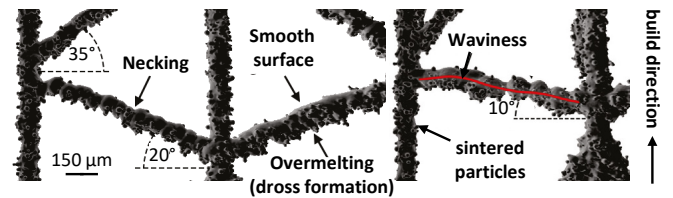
Exemplary geometrical defects of manufactured micro-struts
